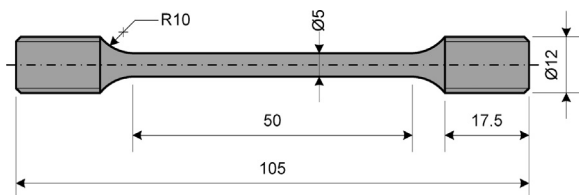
Geometry of sub-size specimen for tensile testing (mm).
